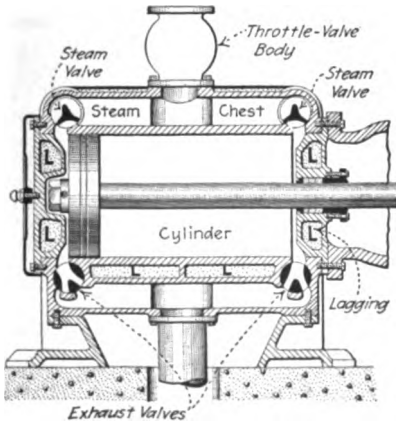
Well heat-insulated engine cylinder. (Cooper Corliss engine.)
